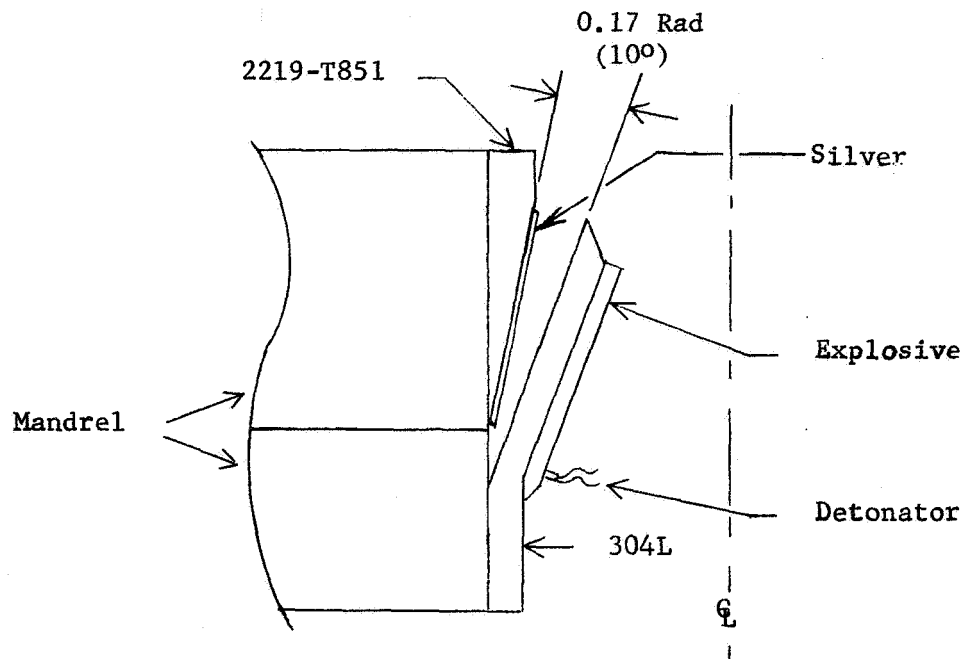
Explosive Bond Joint Method #2 Stainless to Silver/Aluminum
